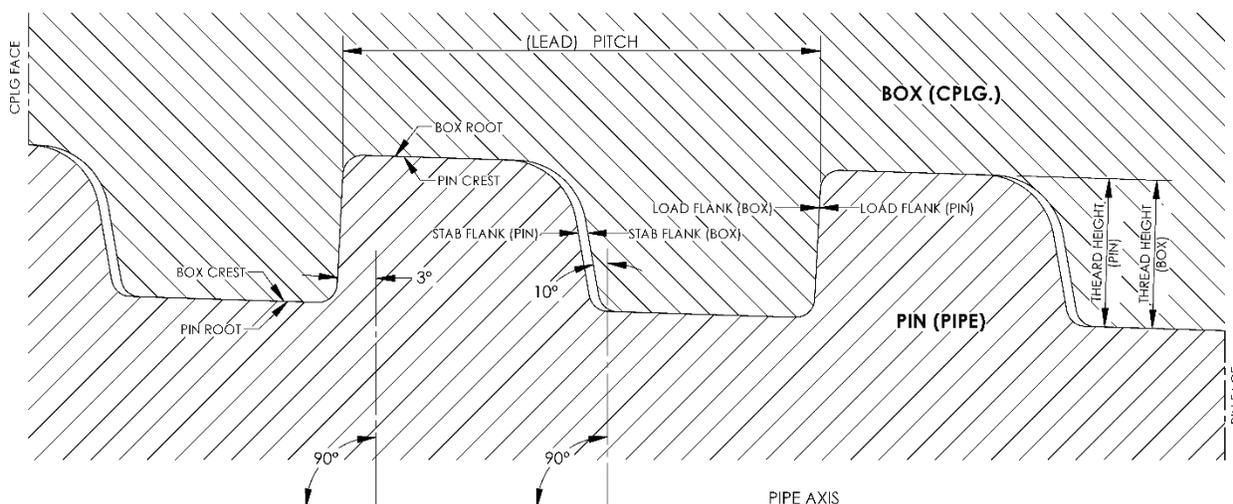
Buttress Thread Configuration for 13<sup>3</sup>/<sub>8</sub> in. OD and smaller Casing
